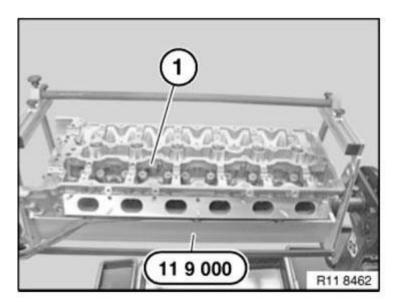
Mounting Cylinder Head On Special Tool 11 9 000 Courtesy of BMW OF NORTH AMERICA, INC.
